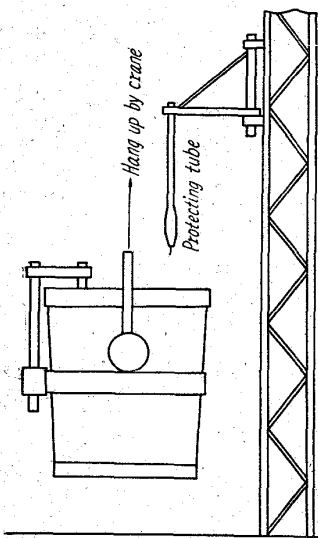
Layout of quick-immersion pyrometry of molten steel in a ladle.
